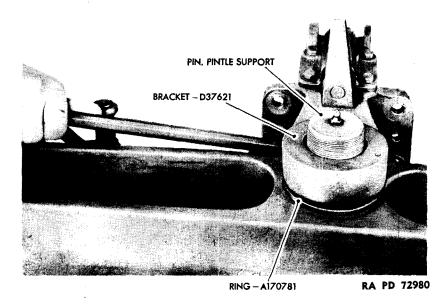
Removing Pintle Support Bracket From Equalizing Support
